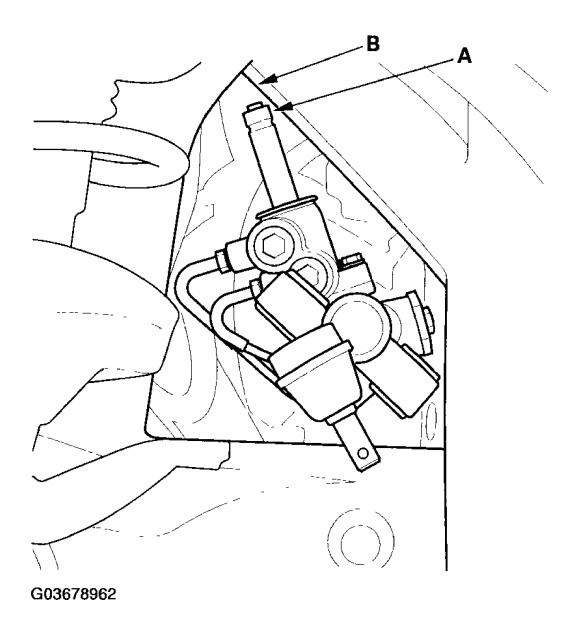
Identifying Pinion Shaft And Wheelwell Opening Courtesy of AMERICAN HONDA MOTOR CO., INC.
